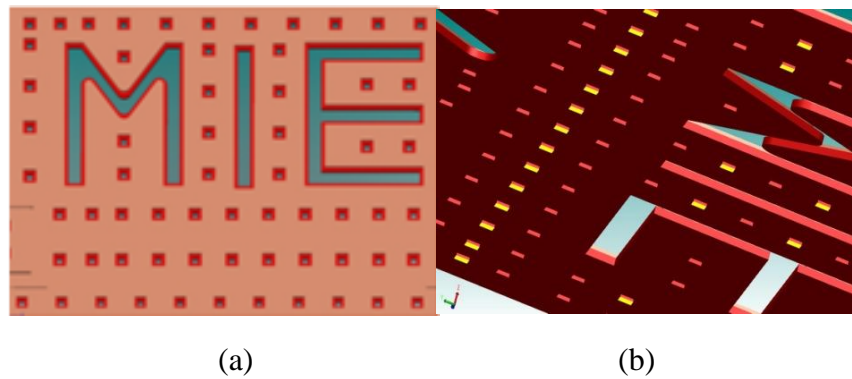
Holes and Dimples (a) Hole and (b) Dimple details
